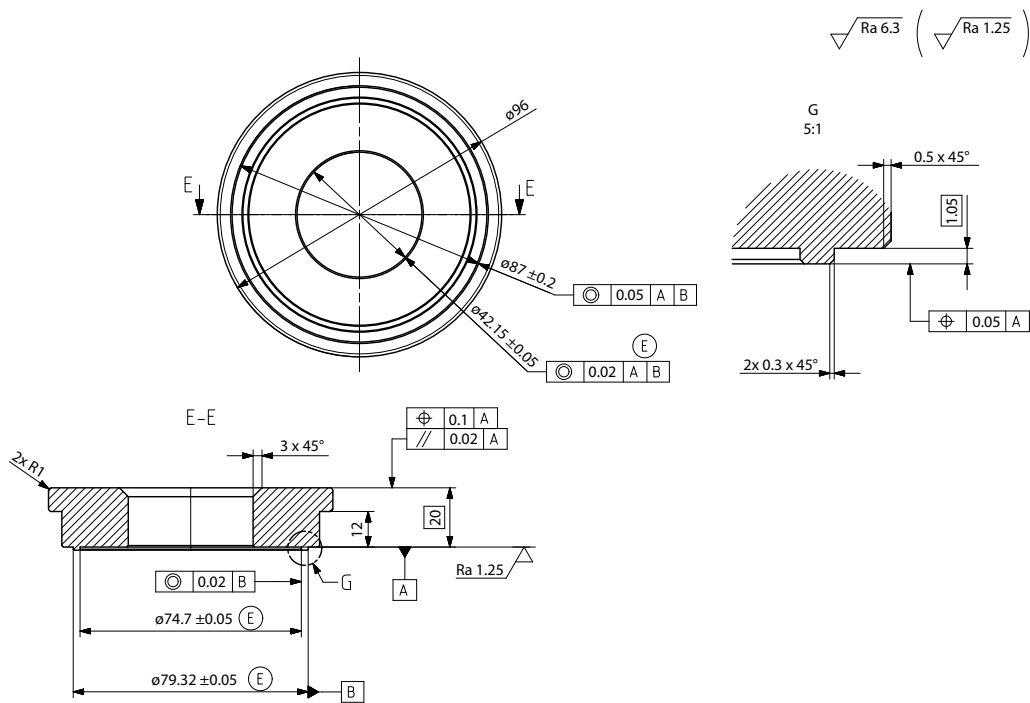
Pressing tool for needle bearing (3 of 4) - OMP center plate
